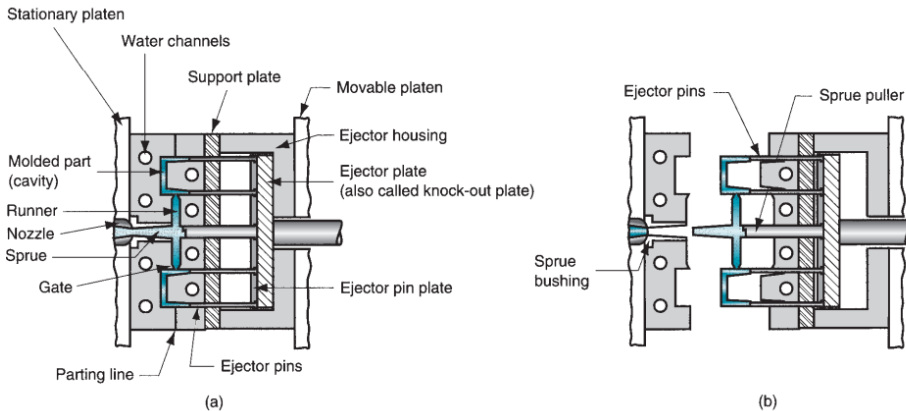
Schematic view of a two-plate plastic injection mould, a) closed and b) open [46].
